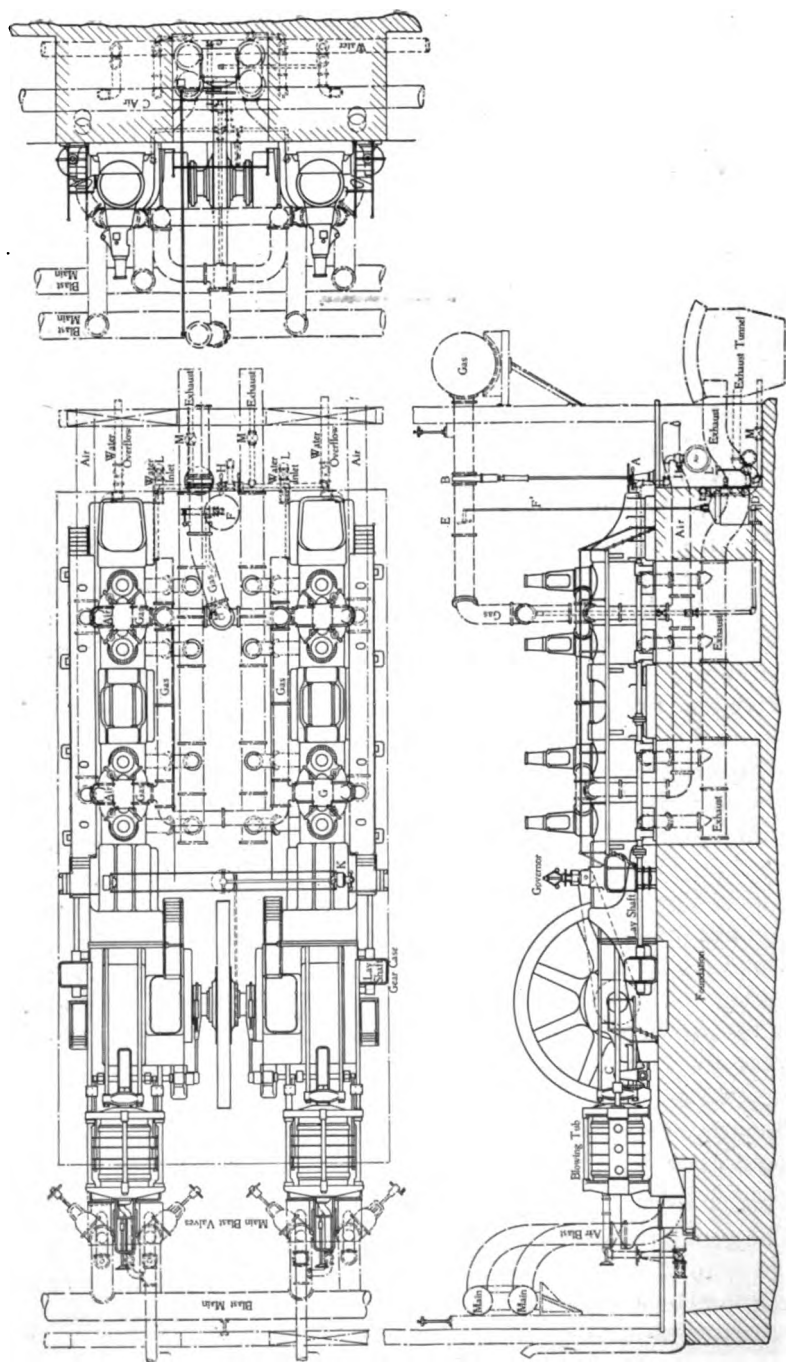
GENERAL PLAN AND ELEVATION OF COMPLETE BLOWING UNIT
